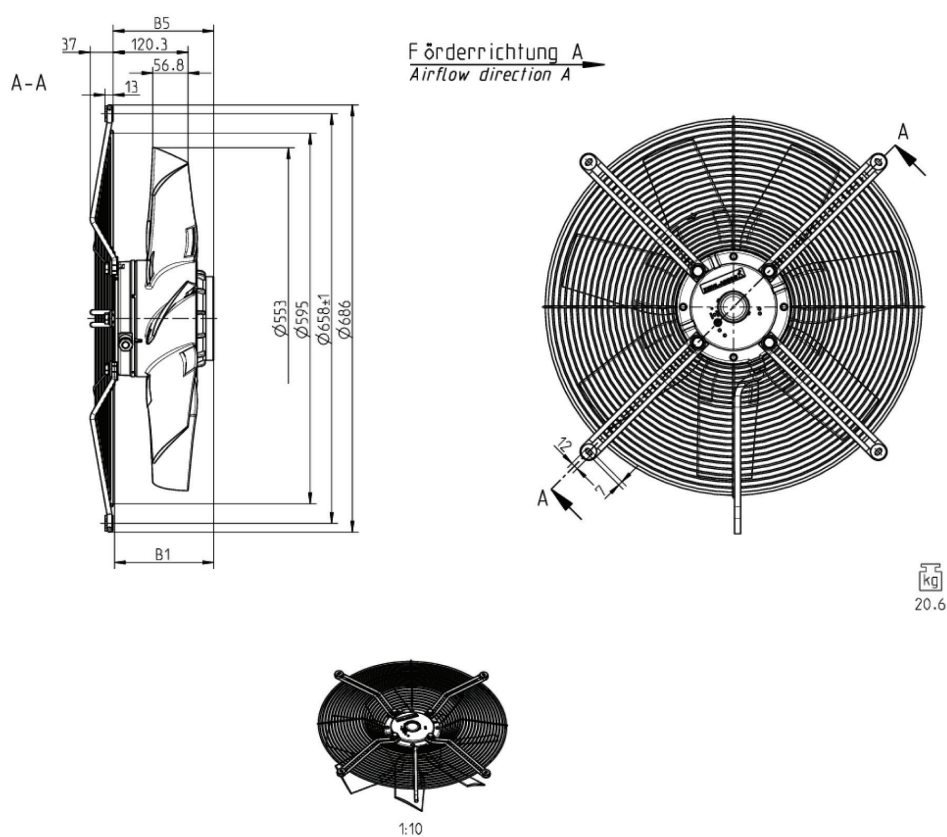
Axial fan – Total diameter incl. fastening 686 mm (dimensions in mm)
